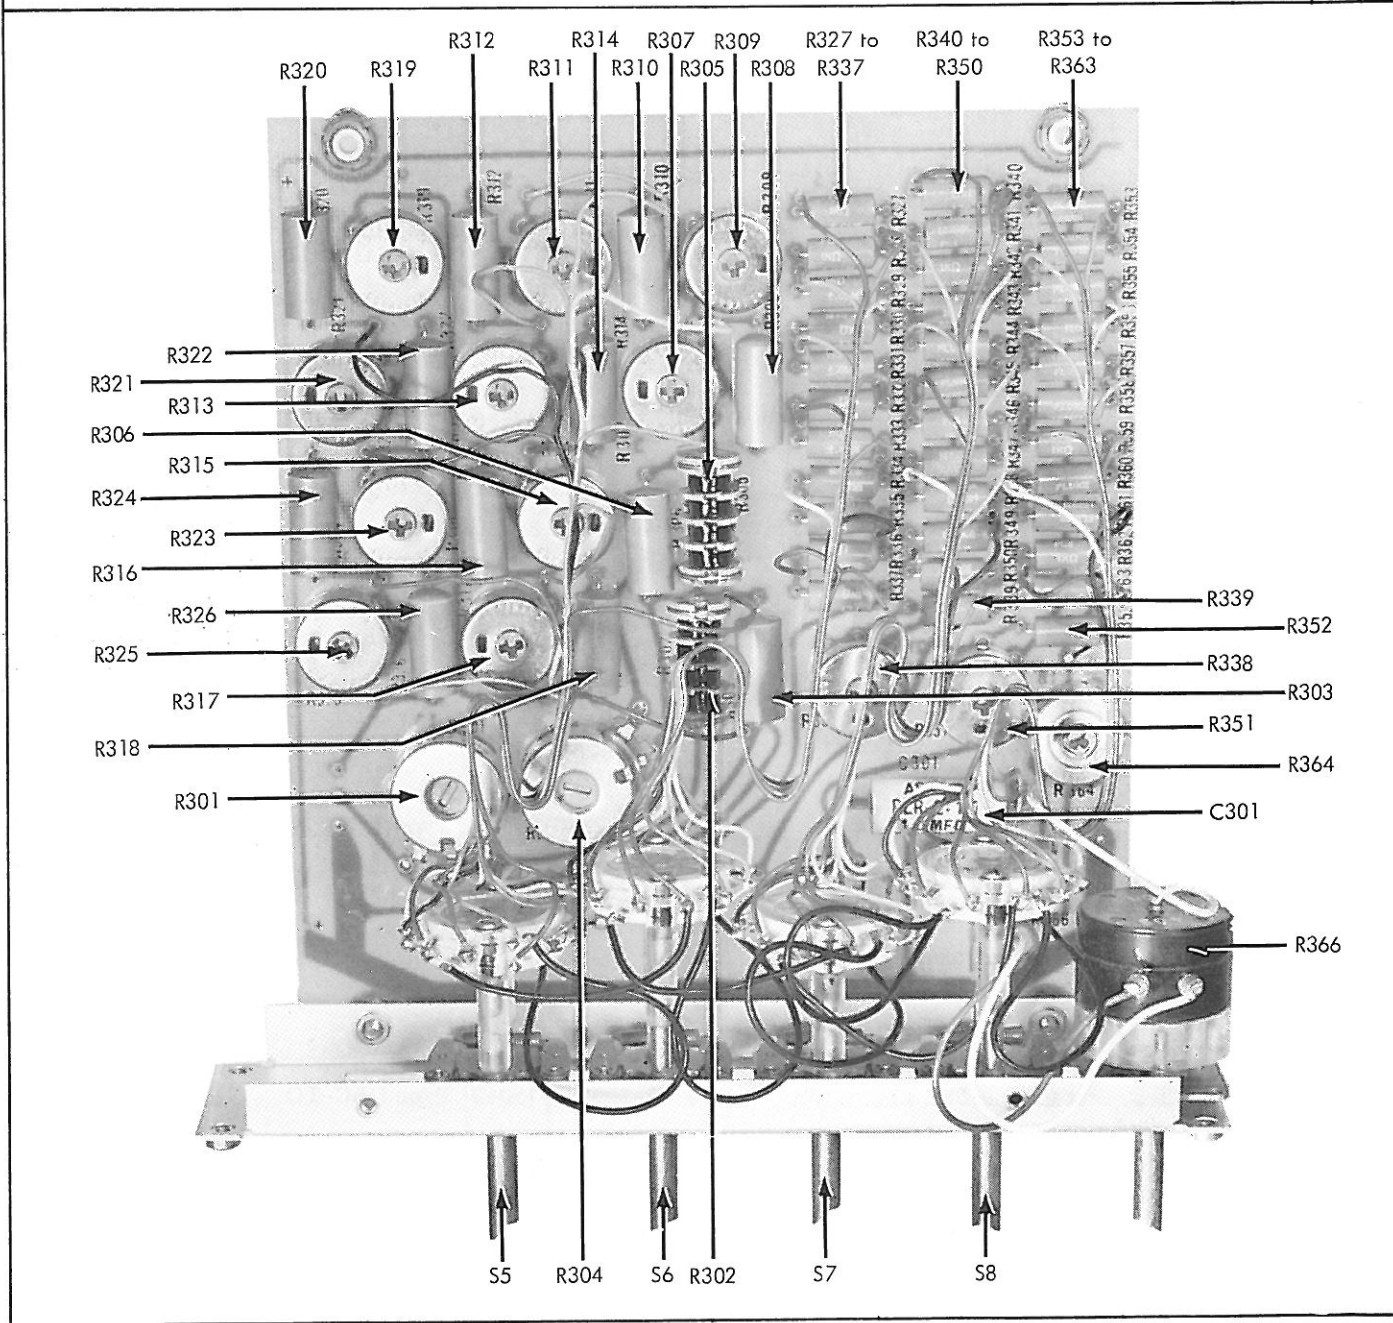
KELVIN-VARLEY BOARD ASSEMBLY
